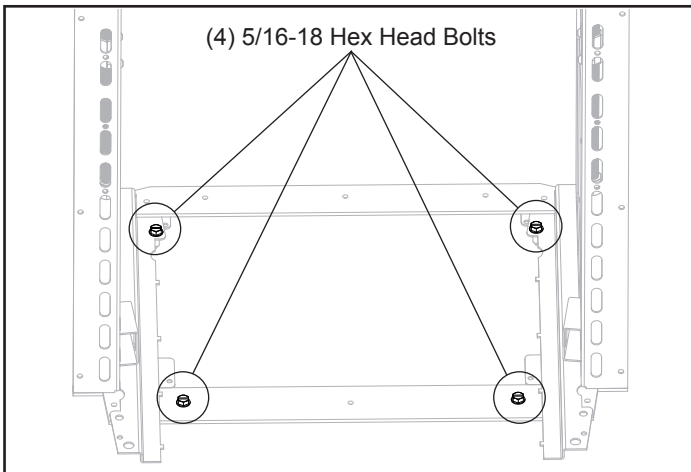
Remove (4) 5/16-18 Hex Head Bolts
